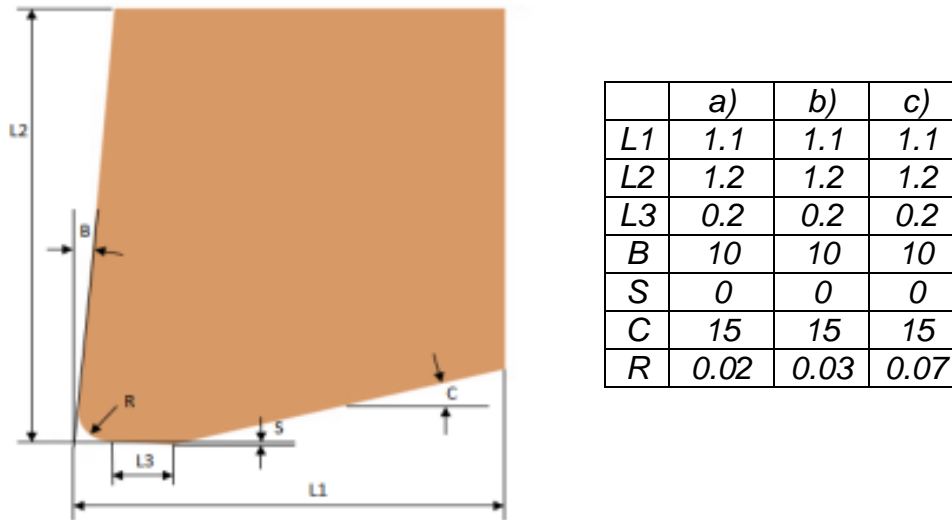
Tool geometry and dimensions used in tool cutting edge radius sensitivity analysis (in millimetres or degrees)
